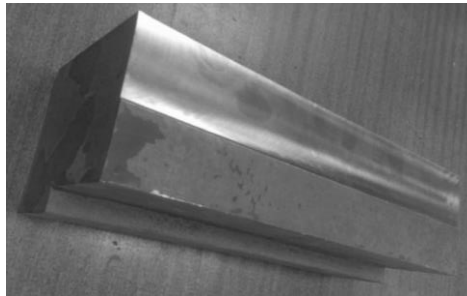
Oxidised surface is replaced by more common metallic surface after machining removal of alpha case
